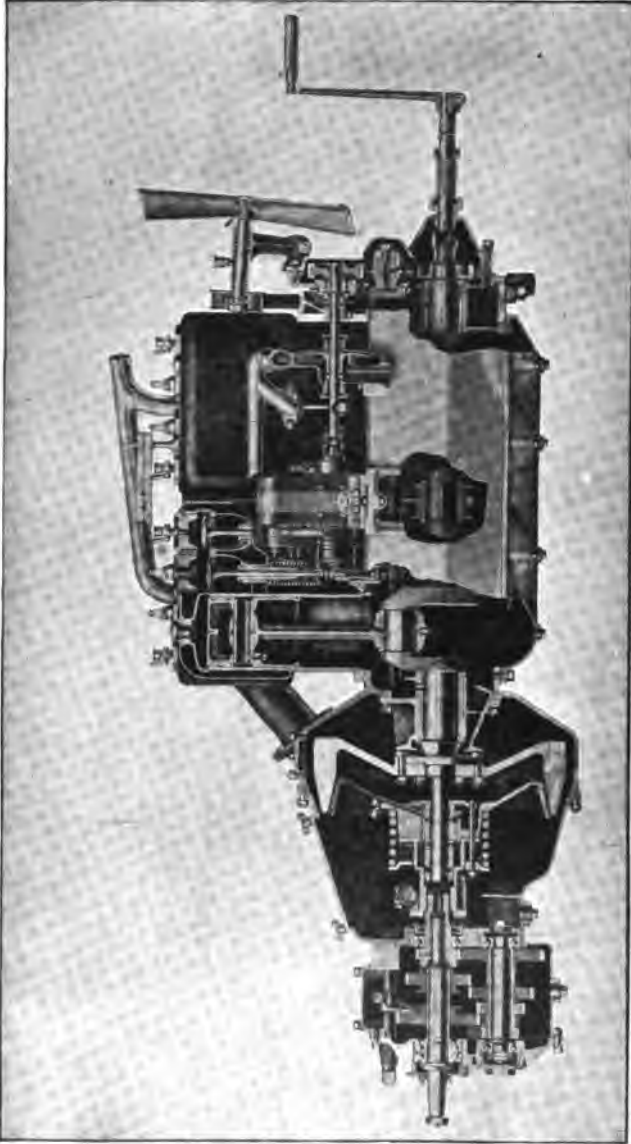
Sectional view of unit power plant used on Jackson automobile, showing interior of motor, clutch case, and speed change mechanism.
